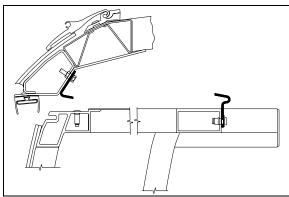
SLIDE-OUT 2" INSIDE – UPPER PART
